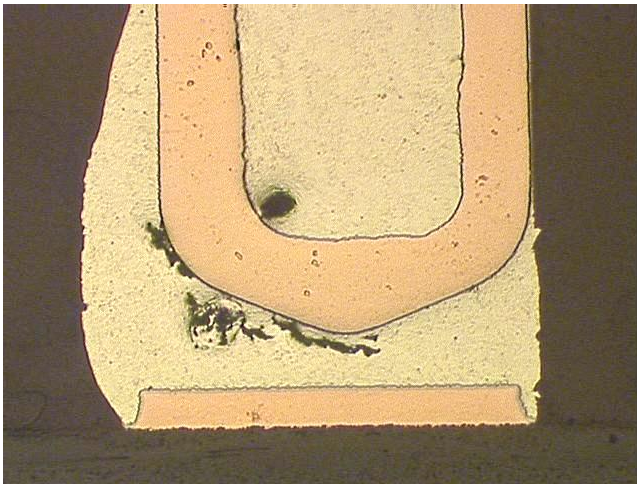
SEARAY, Typical Solder Joints, Pb Free Alloy
